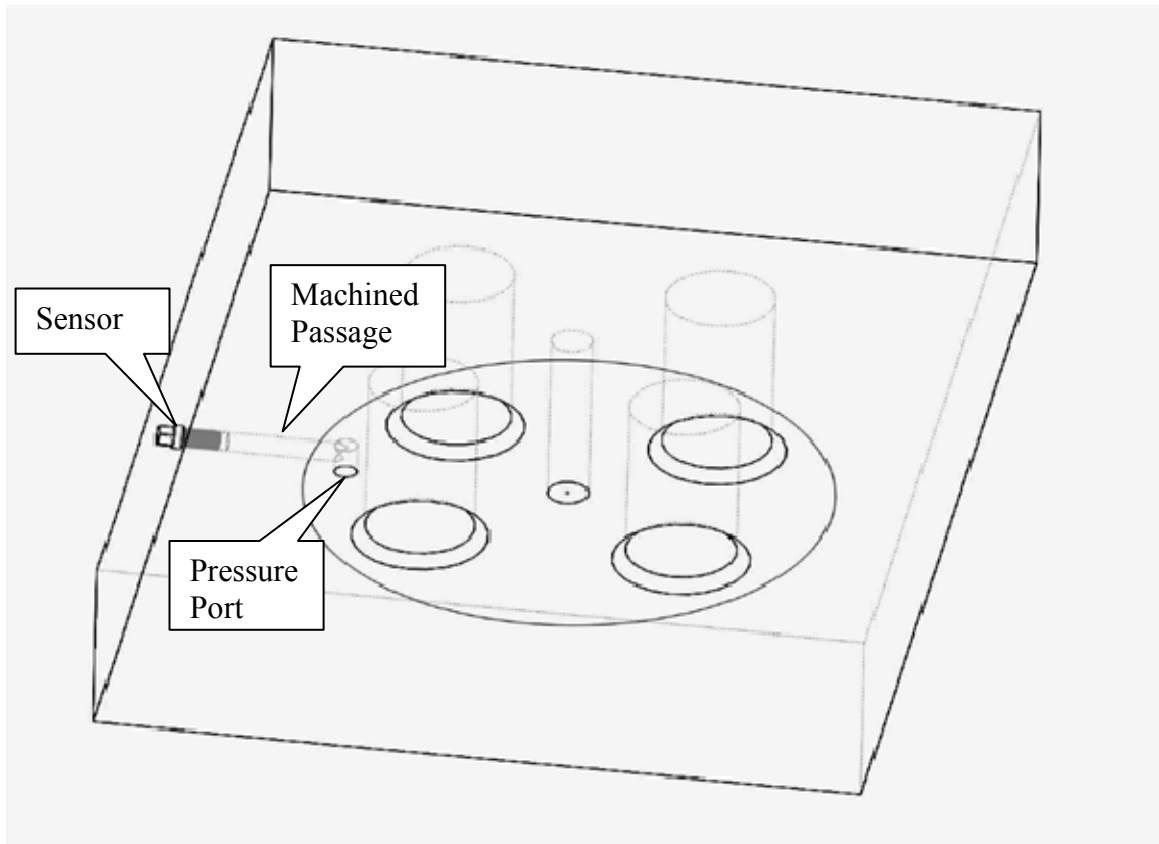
SolidWorks™ Schematic of Pressure Port Machine Work
